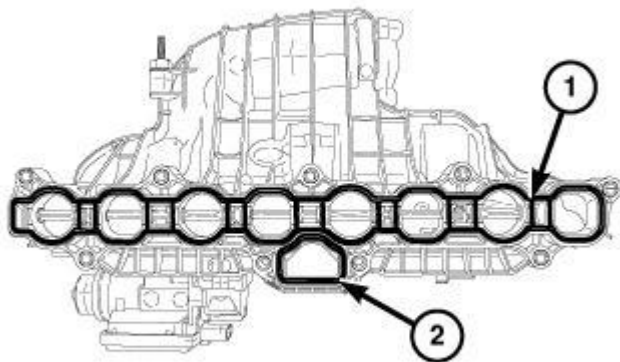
Intake Manifold Gasket & Water Jacket Gasket
